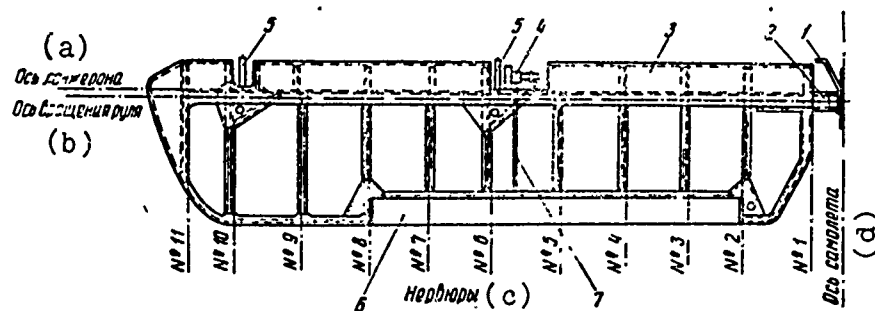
Diagram of the elevator frame: 1 - central stabilizer bracket; 2 - duralumin tube; 3 - covering; 4 - UT-6 trim-tab control electrical mechanism; 5 - elevator mounting bracket to stabilizer; 6 - trim tab; 7 - trim tab control rod.
